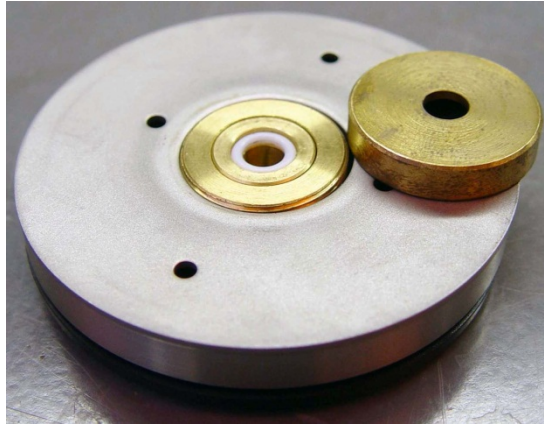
Diaphragm Hub Assembly (Hub and O-rings inserted)
